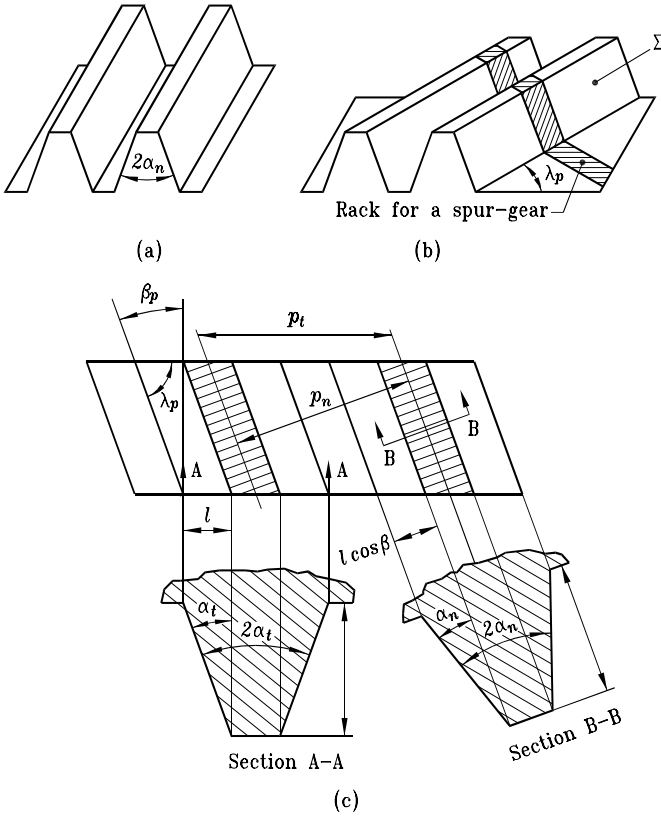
Sections of a rack-cutter for a helical gear.
